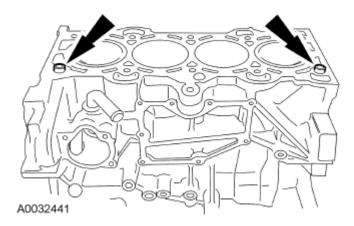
Locating Cylinder Head Alignment Dowels Courtesy of FORD MOTOR CO.
